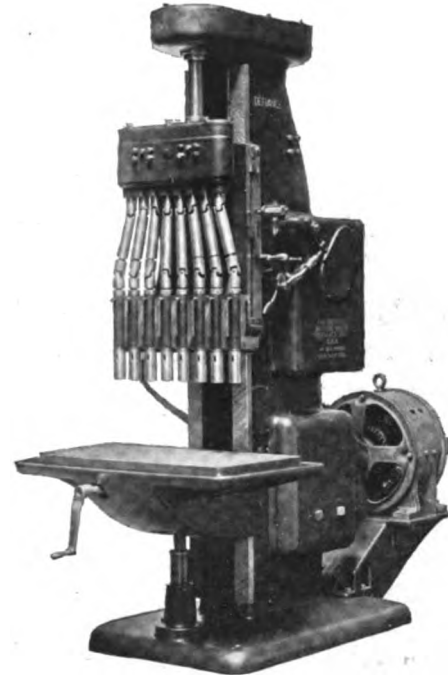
No. 10 Multiple Spindle Drilling Machine
